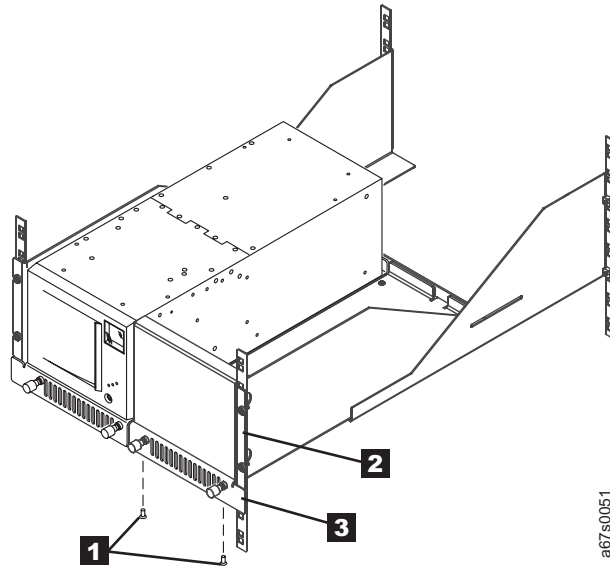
Removing the filler panel to install a second 3581 Tape Autoloader
